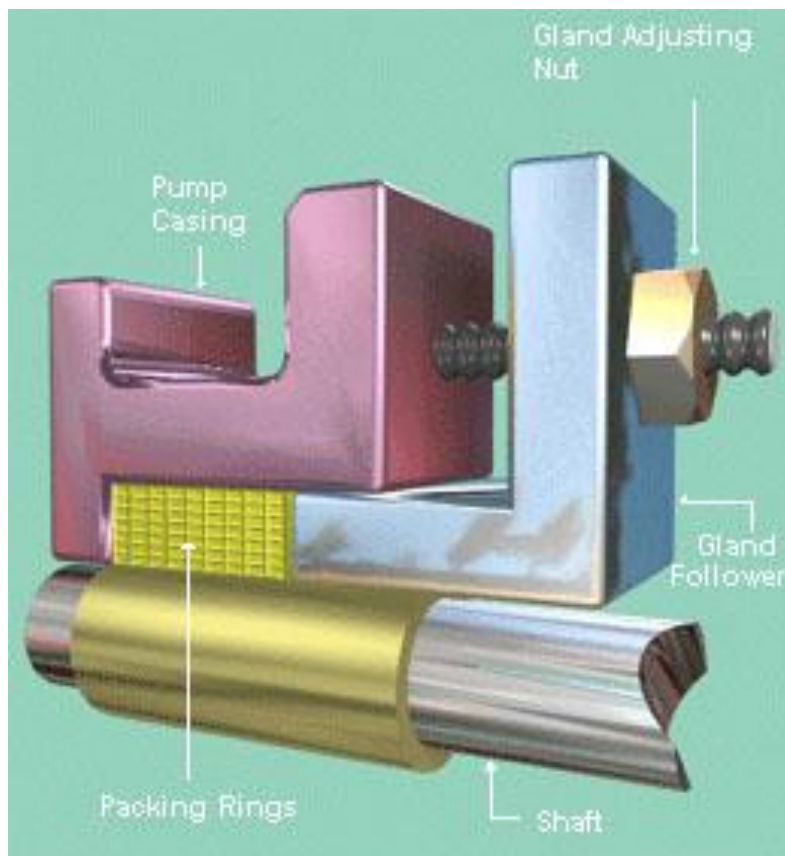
shows the basic construction of a stuffing box which holds five rings of packing. The gland holds the rings in place and can be adjusted to put pressure on the packing by tightening of the adjusting nuts.
